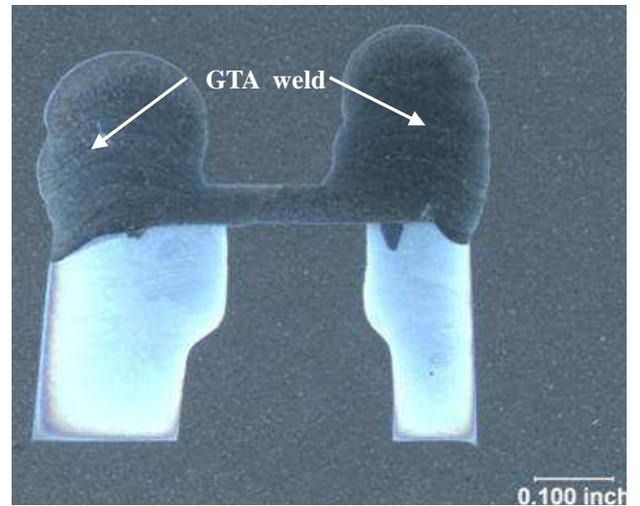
Manual GTA weld attachment of the chicklet and manual GTA weld of the squealer tip
